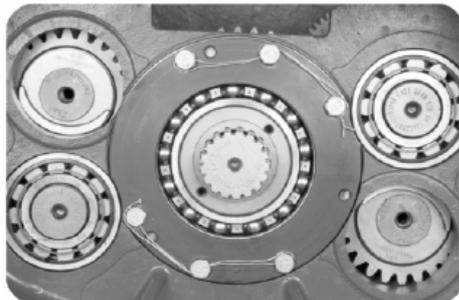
Component Exploded View for Drive Gear of Secondary Transmission
